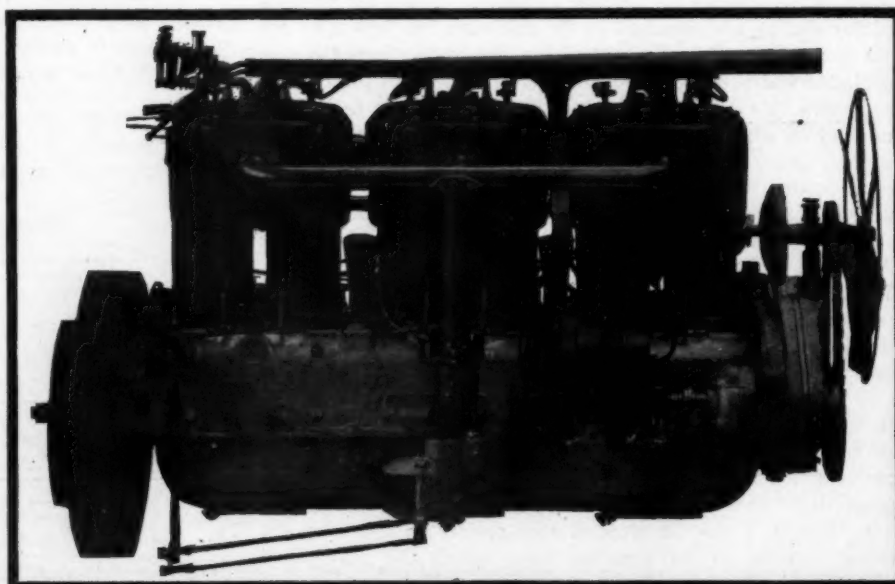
Intake side of 48 Six motor showing T-shaped manifold, dash carburetor control, new type bus-bar and belt-driven fan.
